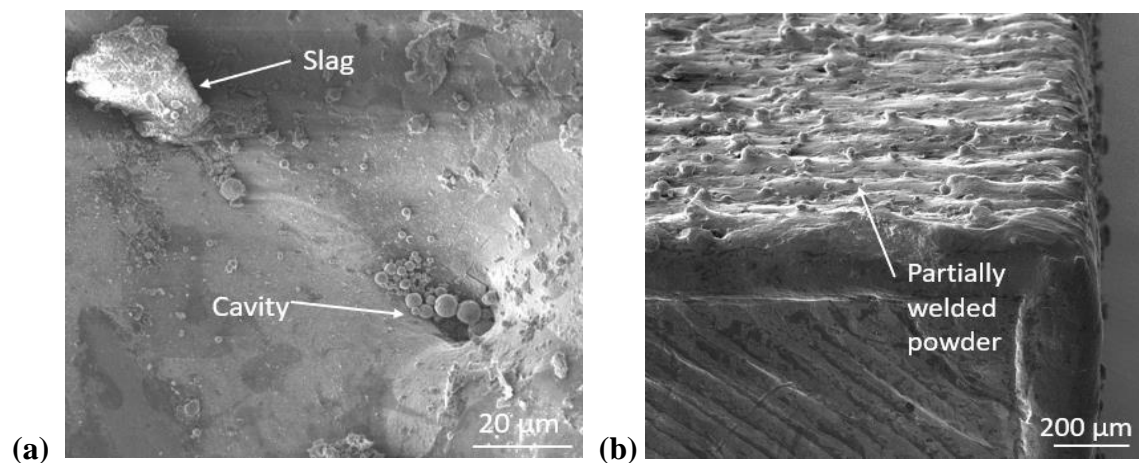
SEM image using secondary electron mode for surface defects on SLM produced parts (a) slag, cavity (b) partially welded particles
